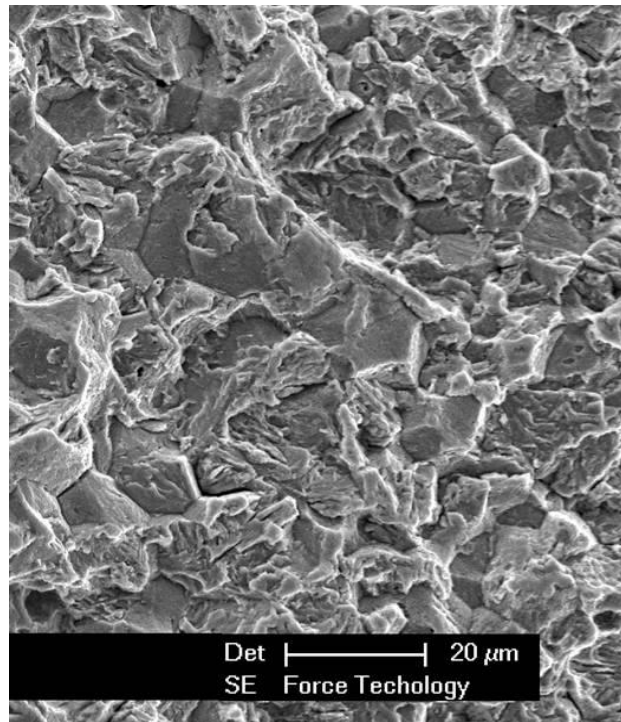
Fracture surface of bolt showing a mixed intergranular and quasi cleavage morphology.
